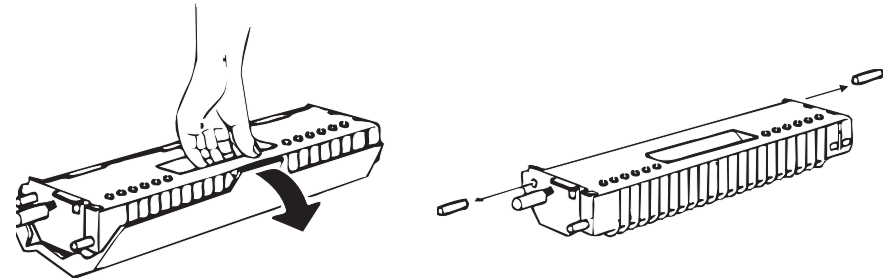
OIL ROLL ASSEMBLY Replacement 2
